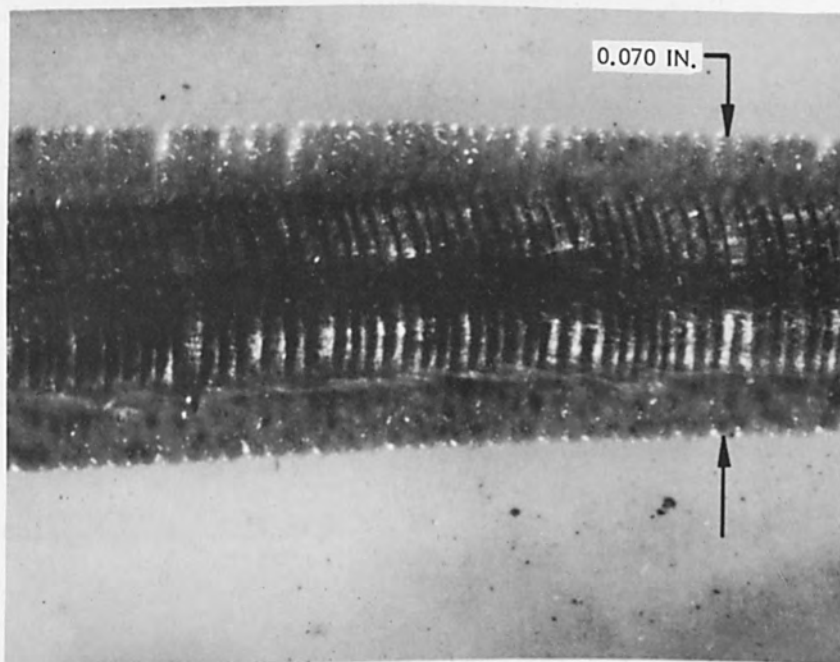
Al₂O₃ Weld-Bead Surface
